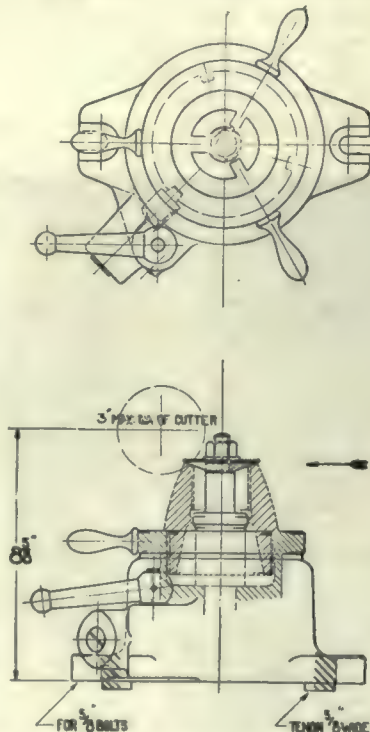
TYPE "B" FIXTURE FOR 4.5 IN. SHELLS.
